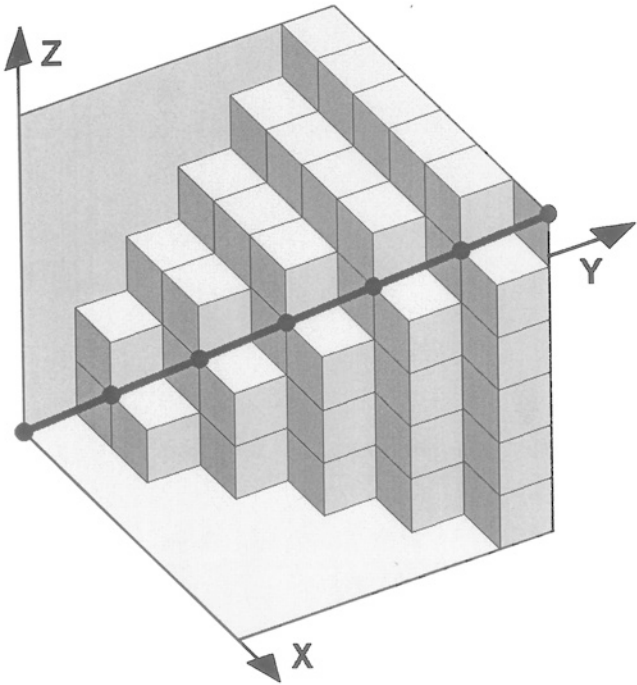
The laser diagonal calibration setup for a typical machining centre (courtesy of ISO standards/Renishaw plc)
